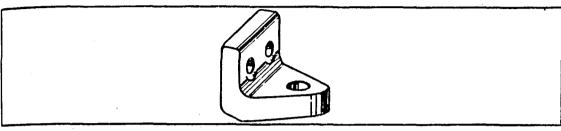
60, 80, 95, 100 & 115 13. Lug X LAYOUT
